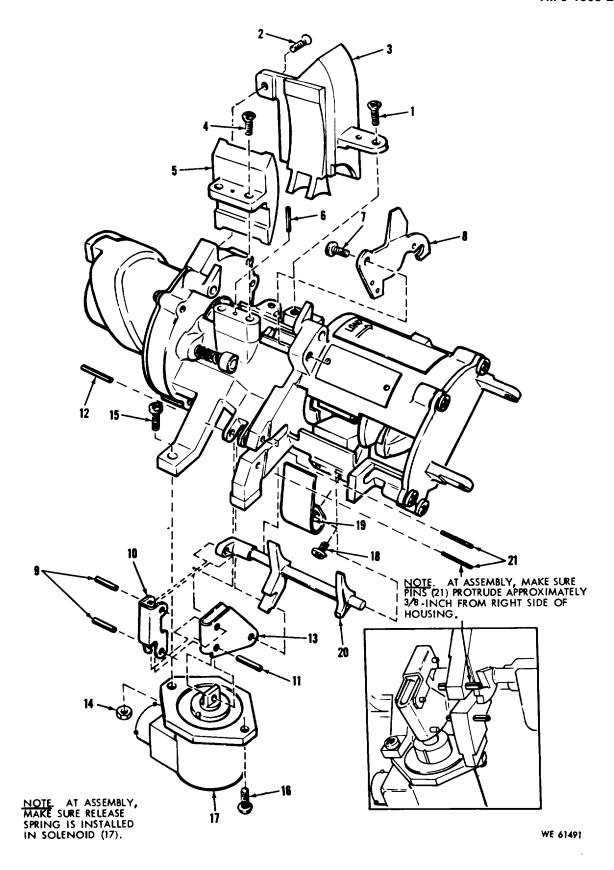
Delinking feeder MAU-56/A-exploded view (sheet 1 of 3).
